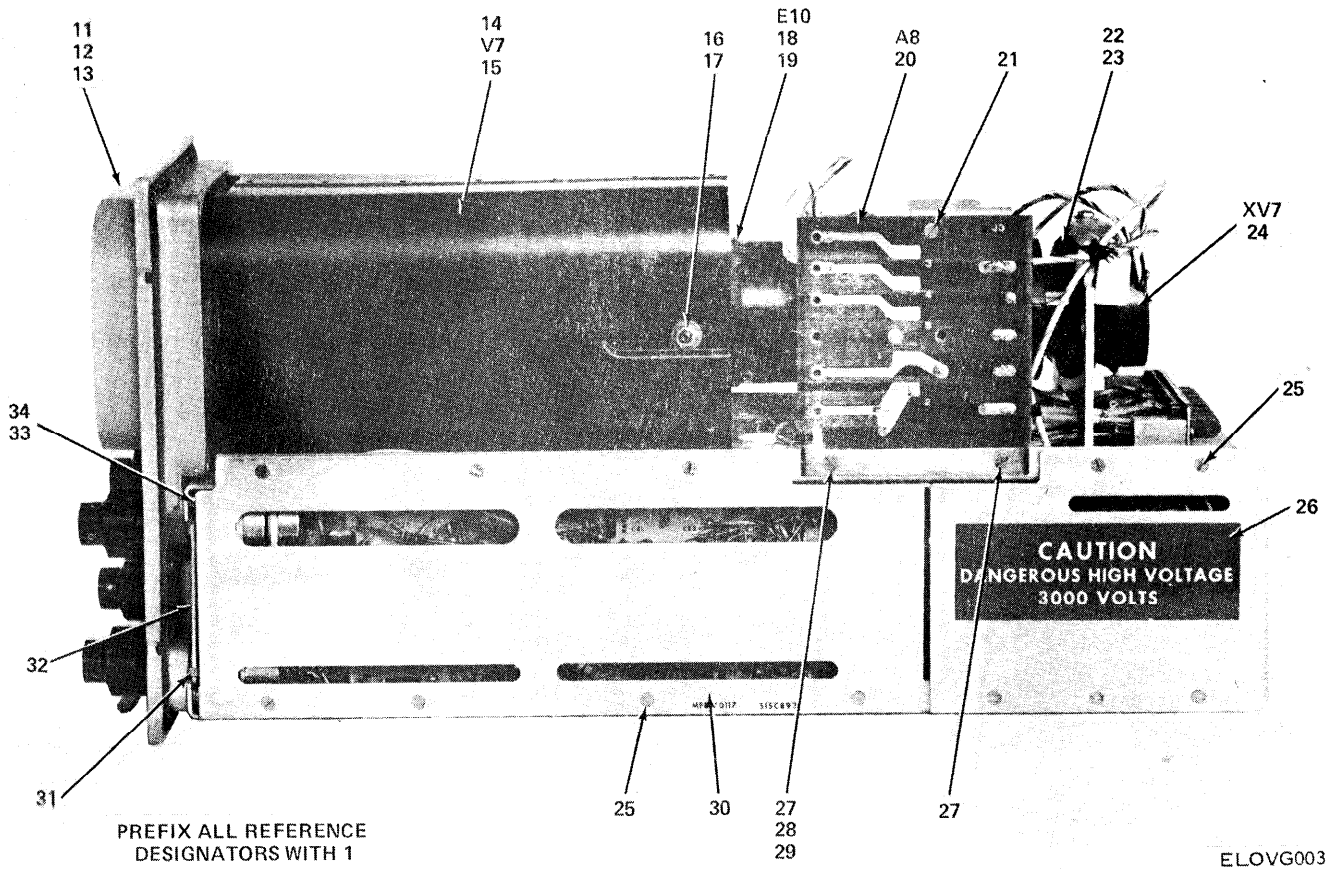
② Display module main assembly (sheet 2 of 6).
